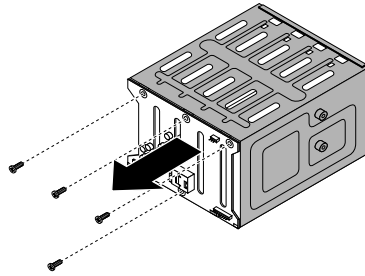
Removing the 3.5-inch hot-swap hard disk drive backplane
